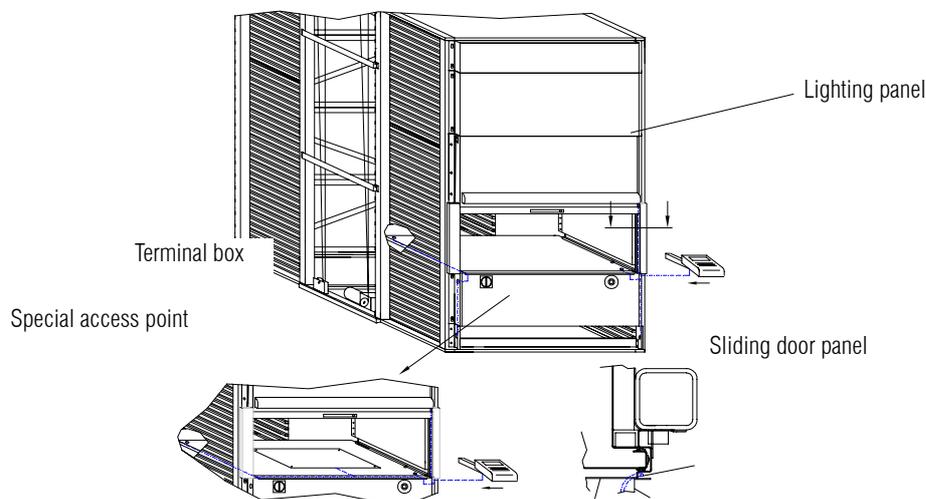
Installing the terminal box, keyboard mounting arm and lighting panel
